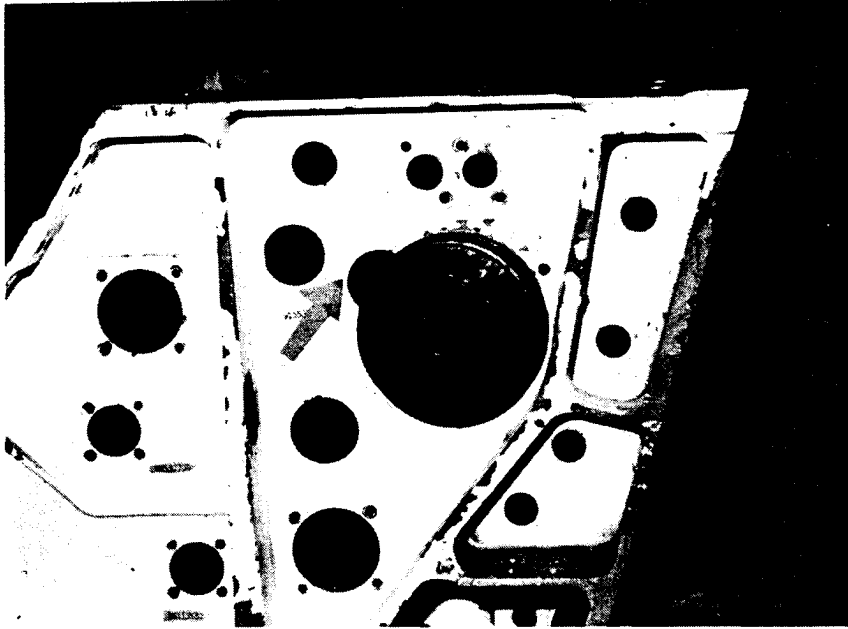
View of the mandrel and crescent filler prior to cold-working.
